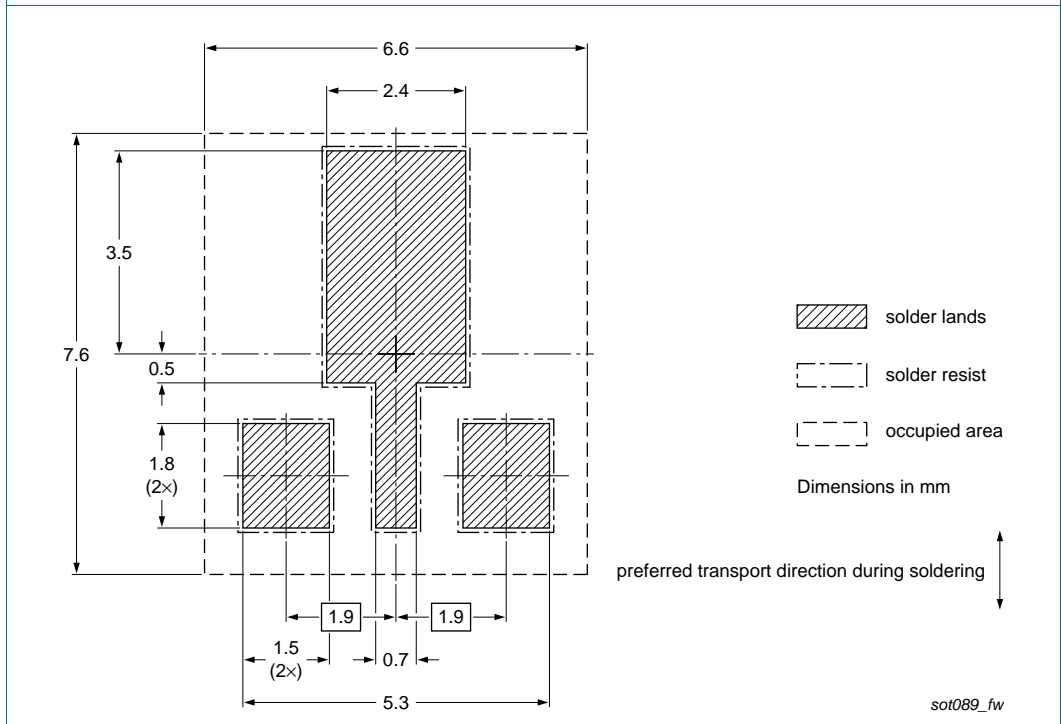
Wave soldering footprint SOT89 (SC-62/TO-243)
